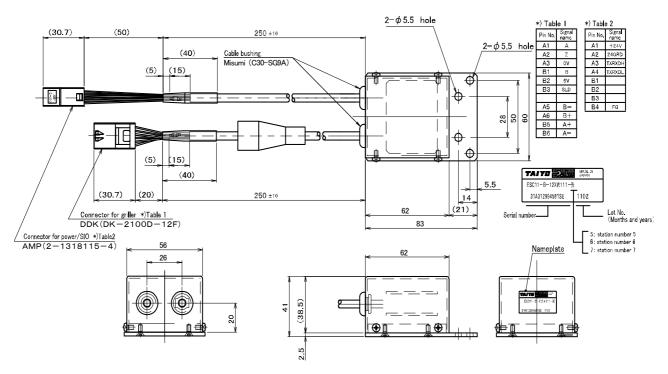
Outline drawing of the control unit (4F-MEHCU-02)
